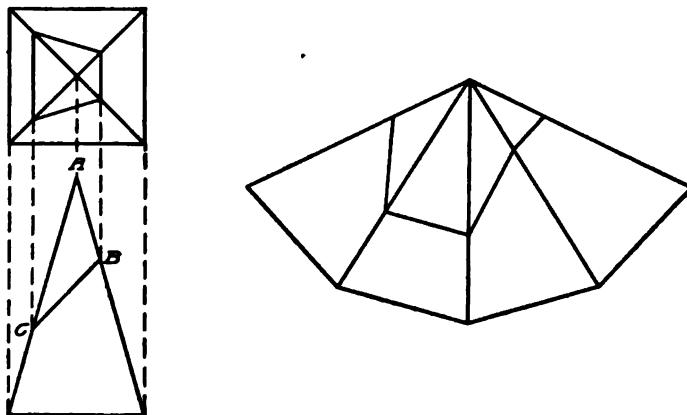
Plan, Elevation, and Development of a Square Pyramid and Cutting Plane
